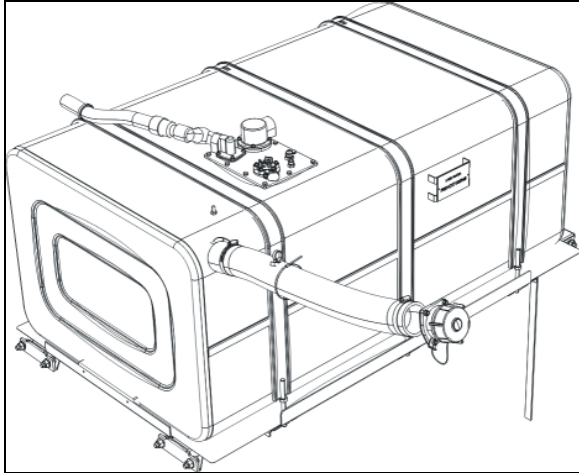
STEEL FUEL TANK ASSEMBLY
